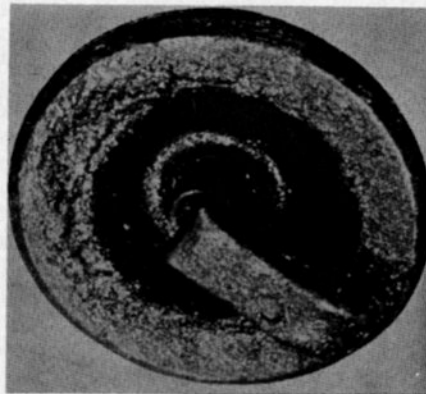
Damp or wet black carbon coating over entire firing end of plug. Could be caused by rich carburetor mixture, too much oil in fuel, or low ignition voltage. Could also be caused by incorrect heat range (too cold) for operating conditions. Correct the defects or install a hotter plug.
